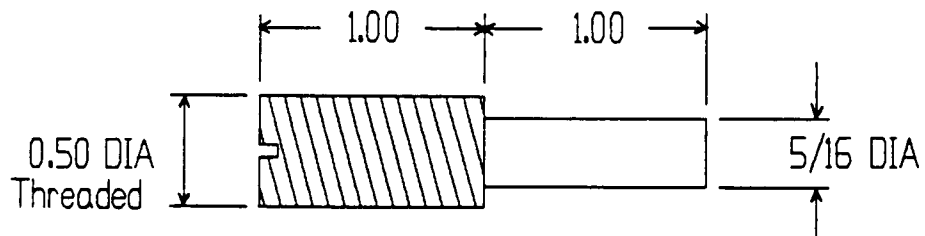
Heated Cavity Apparatus, Spring Mechanism
